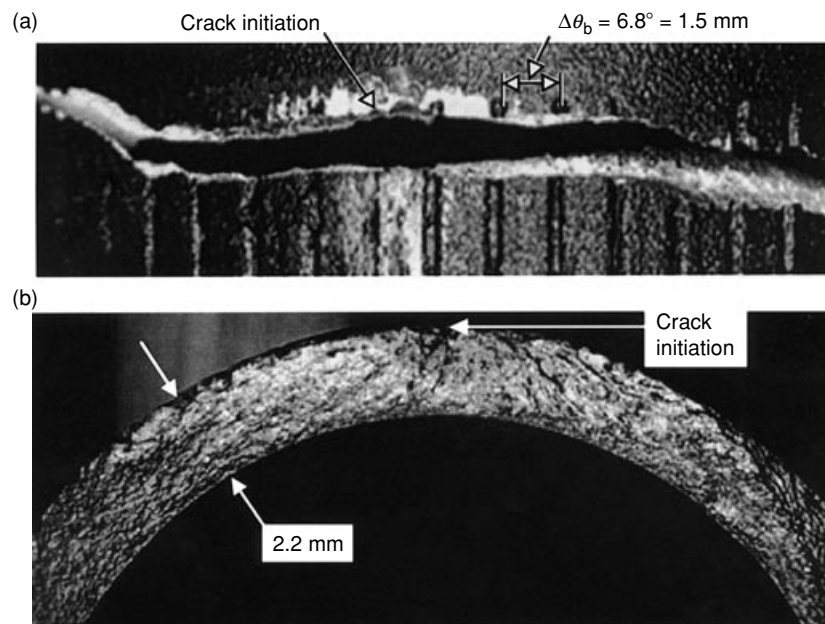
Here (a) outer surface of a failed handlebar and (b) fracture surface of the handlebar shown in (a).
